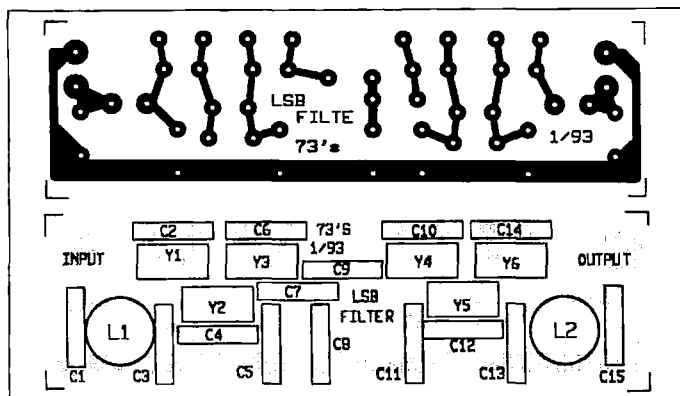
(a). PC board foil pattern for the lower sideband filter. (b). Parts placement diagram.
